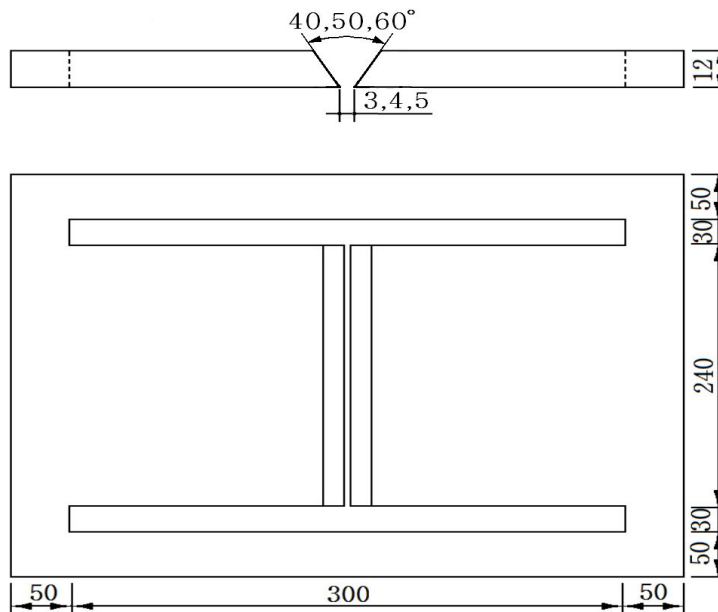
Restraint welding joint shape of specimens
